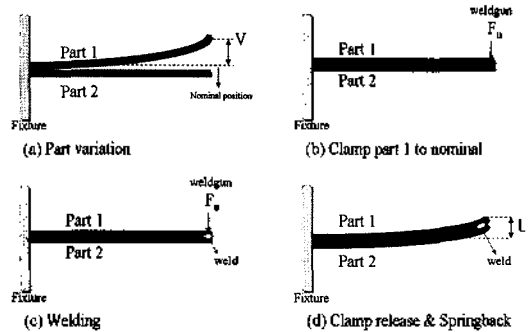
Simple 2-D compliant part under weld process.
